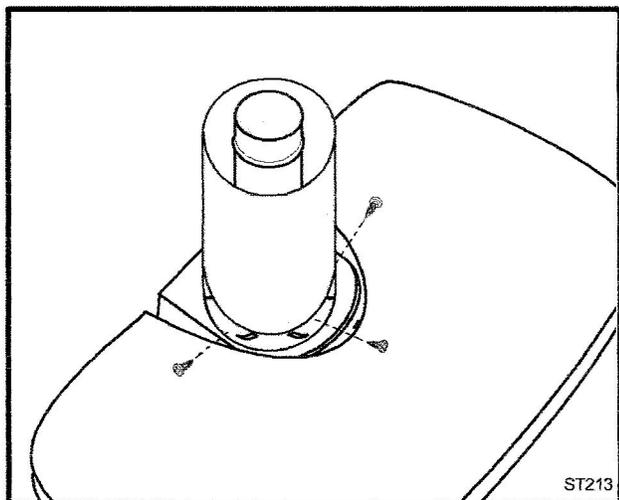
Fasten outer pipe with #12 x 1/2" sheet metal screw.
